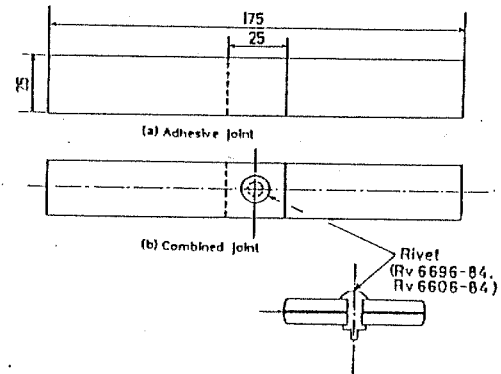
Shape and sizes of the adhesive and adhesive/rivet combined joints.
